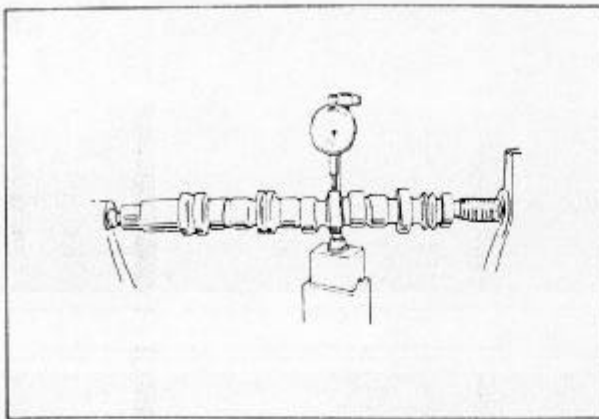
A — 49 MEASURING THE CAMSHAFT BENDING
